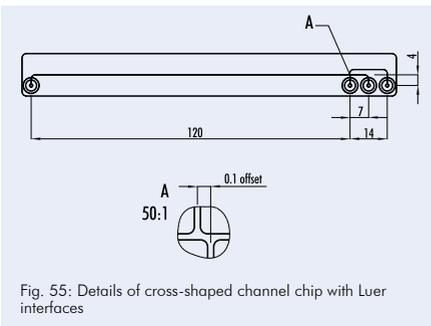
Details of cross-shaped channel chip with Luer interfaces
